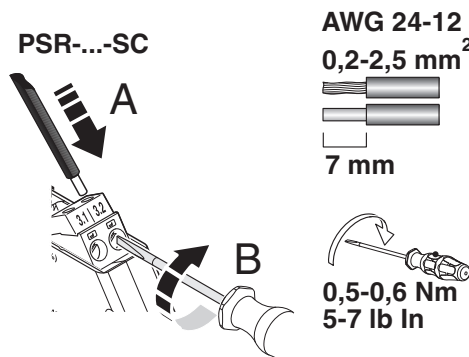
Connecting the cables for PSR-...-SC (screw terminal block)
